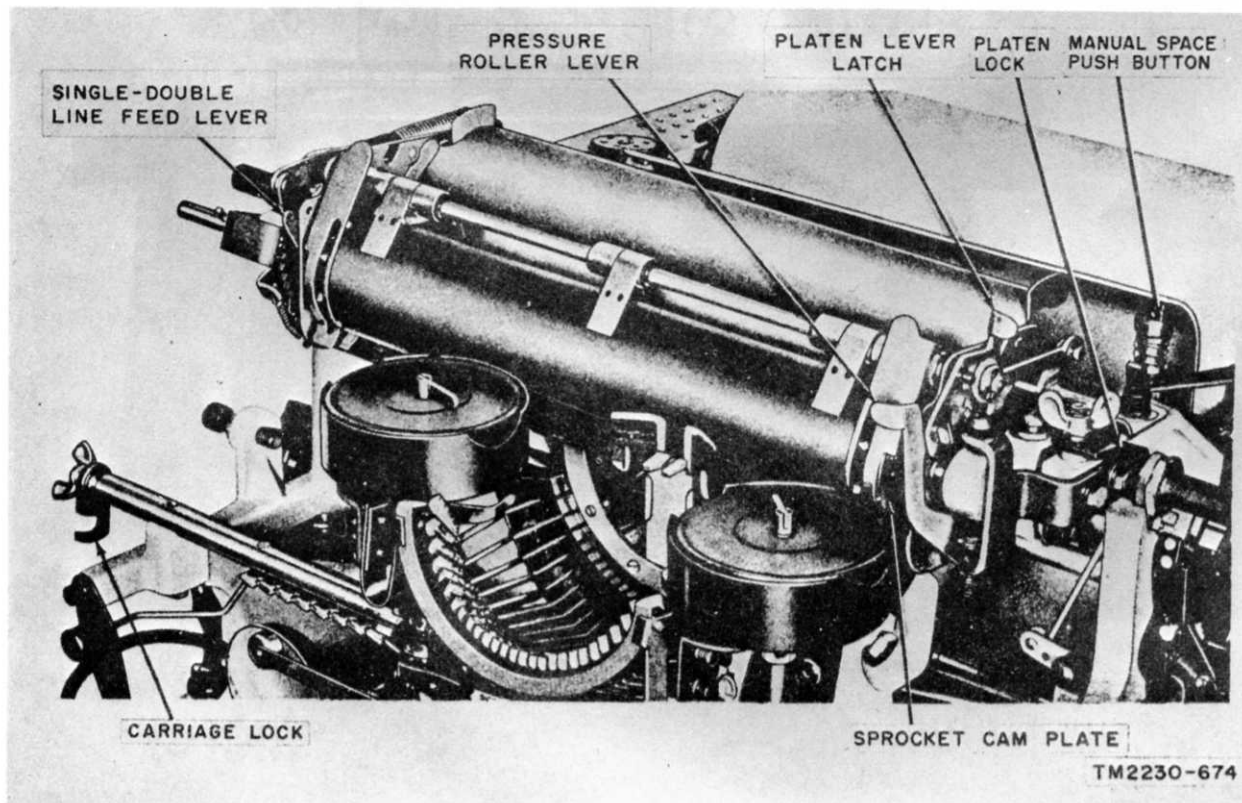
Teletypewriter, dust cover removed, showing platen and carriage locks.
